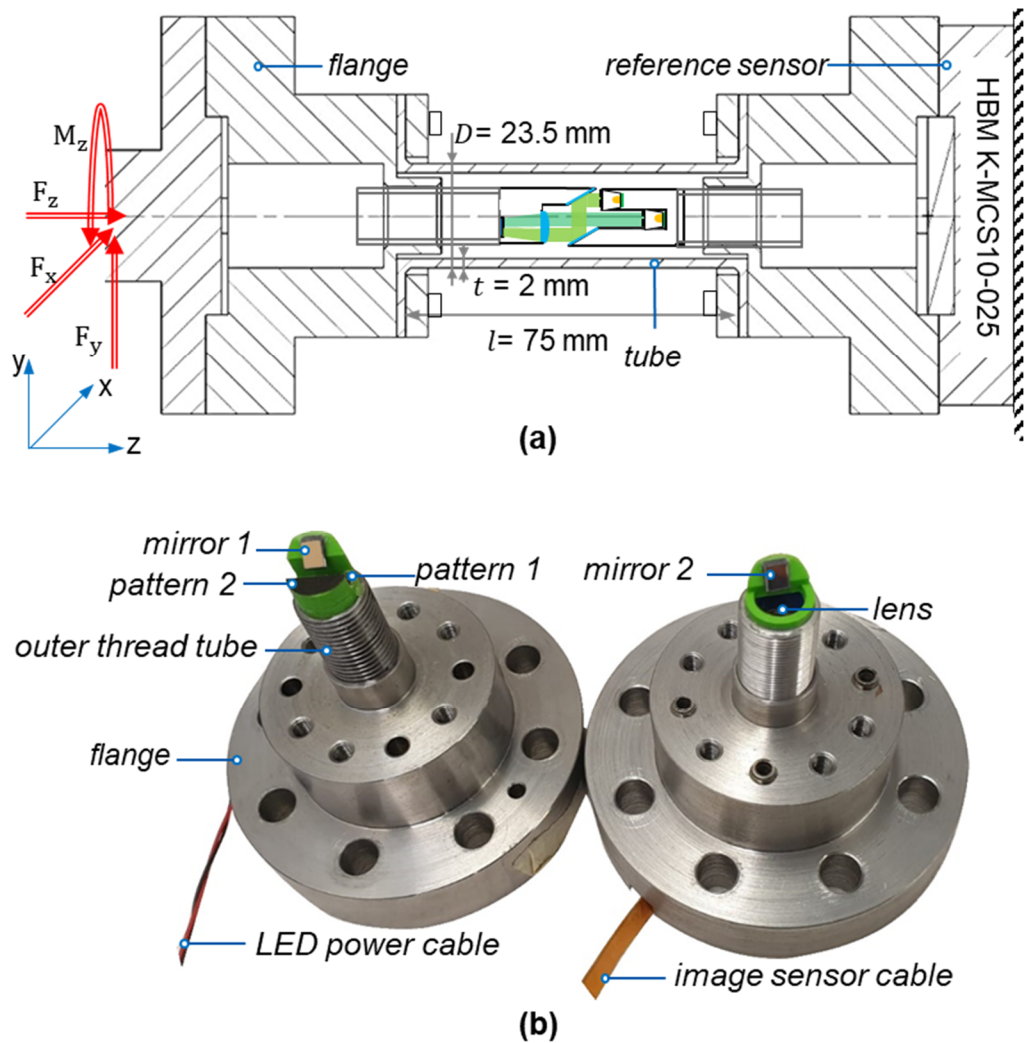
Evaluating the multi-axial load detection: (a) test bench design and (b) sensor prototype [O3].
